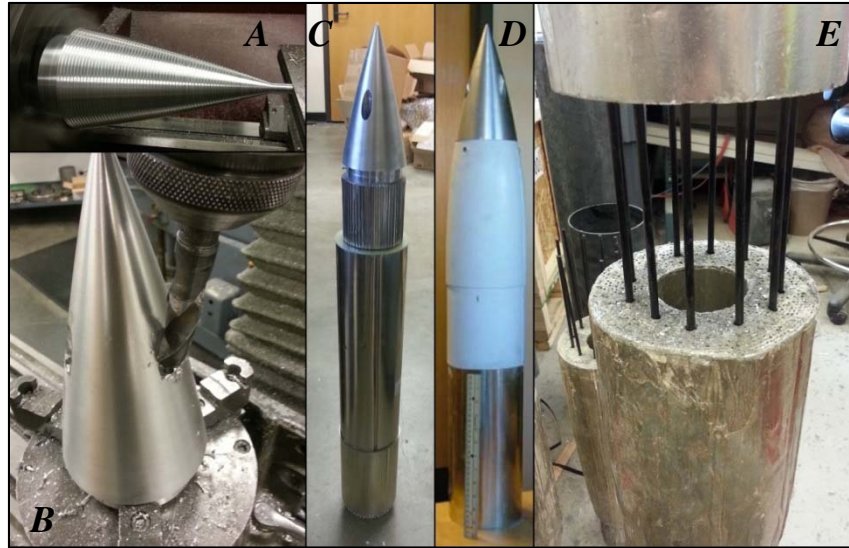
(A) Machining of the one of the Phase I aluminum nose cones, (B) and feed ports. (C) The nose cone and modified honeycombed aluminum, (D) and their integration into the rocket assembly. (E) Carbon fiber rods reinforced joints between sections of energy absorbing material to help resist shearing during impact.
